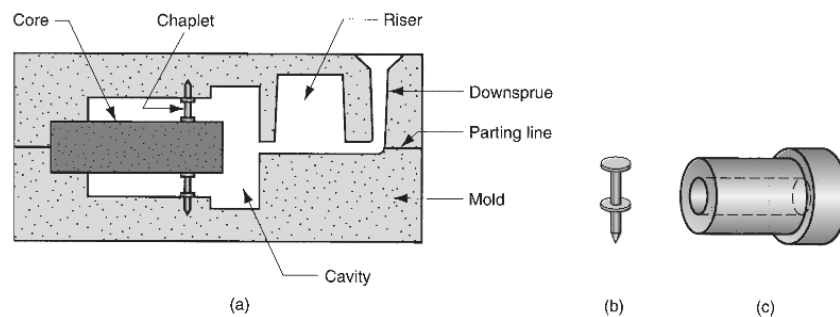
(a) Core held in place in the mold cavity by chaplets, (b) possible chaplet design, and (c) casting with internal cavity .
